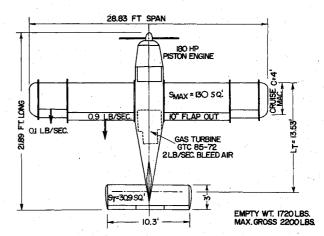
WVU technology demonstrator STOL aircraft plan view and dimensions.
